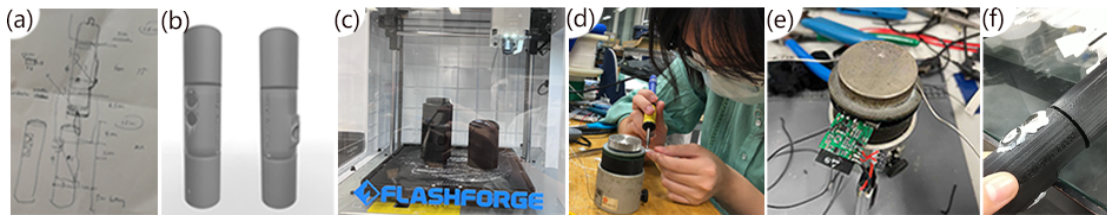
Affective umbrella setup: (a) Original sketch (b) Model and render effect (c) Fabrication in a 3D printer (d,e) Circuit board soldering (f) Using hot melt glue to assemble the umbrella handle
